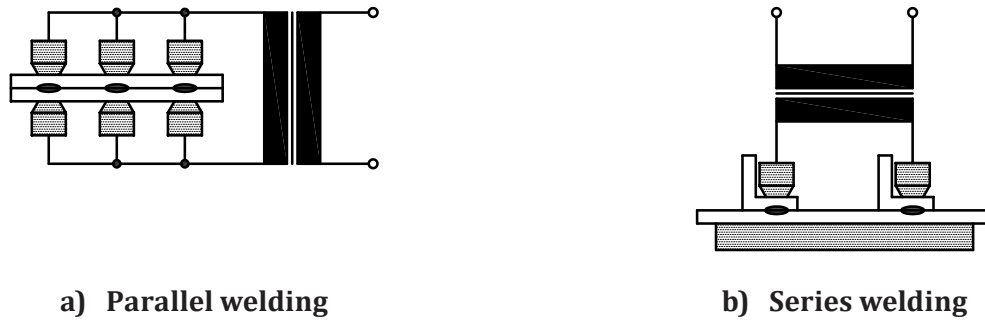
Parallel and series spot welding — Indirect welding
